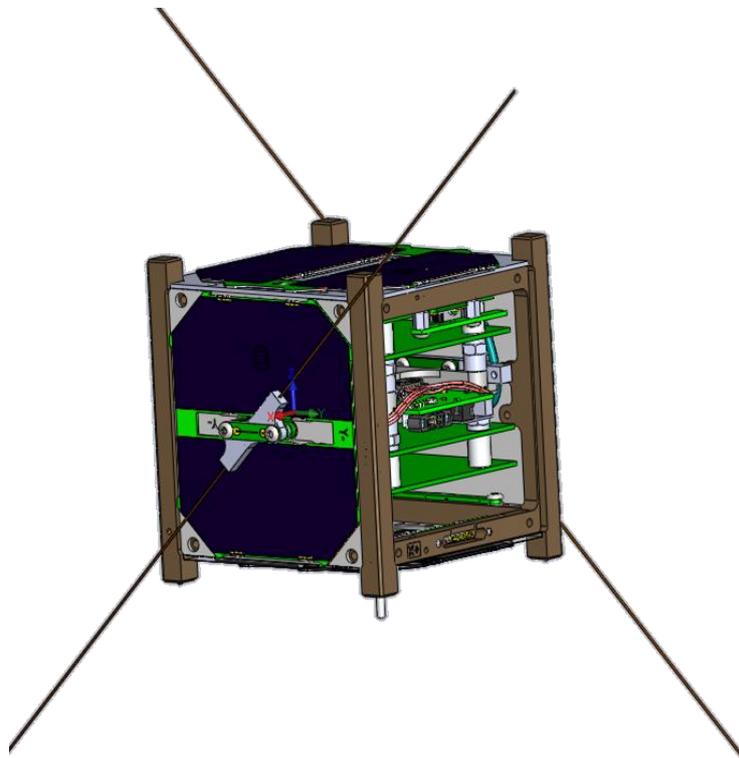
CAD model of MTCube with one side panel removed allowing to view the internal configuration.
